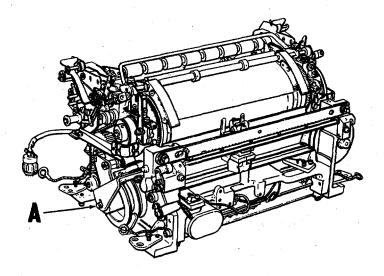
Right-Hand Feed Wheel Positioning Adjustment
